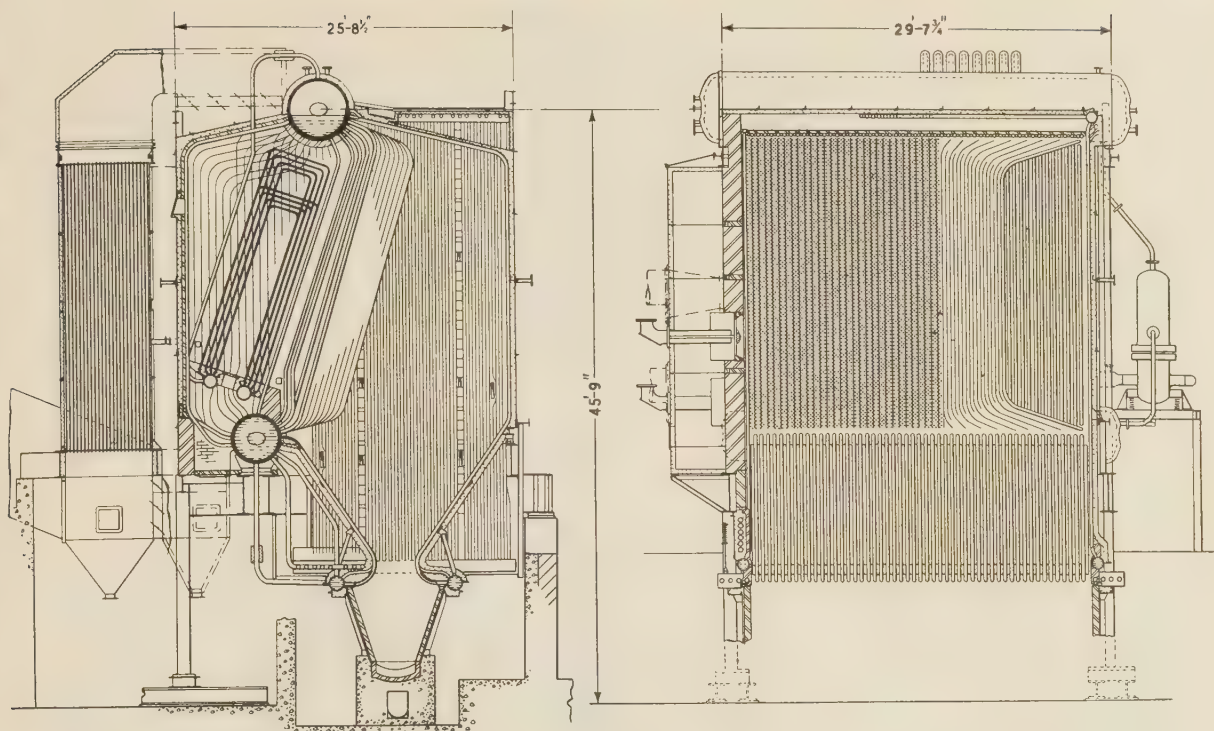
INTEGRAL-FURNACE BOILER FOR FIRING WITH PULVERIZED COAL AND BLAST-FURNACE GAS; YOUNGSTOWN SHEET AND TUBE COMPANY
